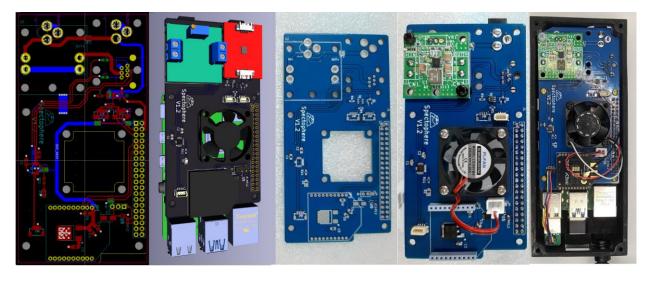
Main board designs: from left PCB in KiCAD, 3D model in KiCAD, manufactured PCB, soldered PCB, Fully Assembled Main board with 3d printed enclosure.
